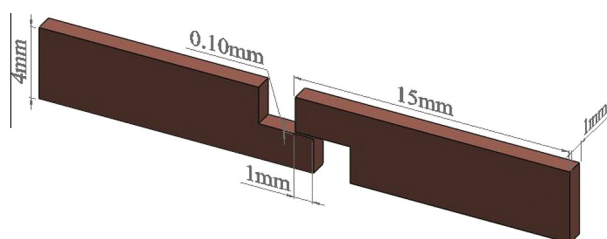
Schematic diagram of shear-lap solder joint specimen.
